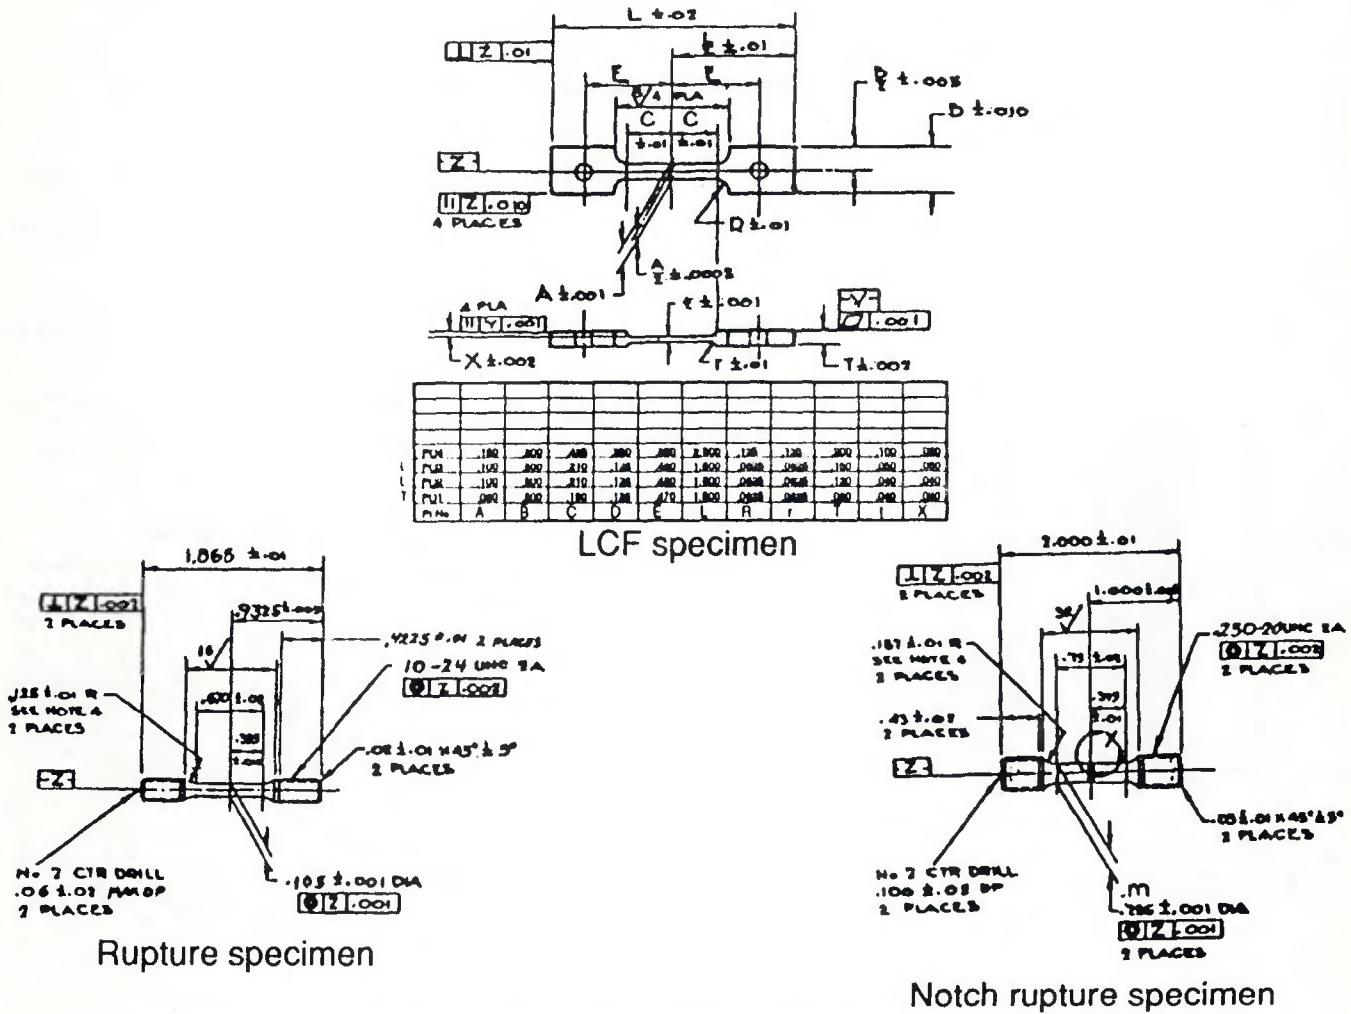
Schematic of subscale mechanical test specimens used in the evaluation of the weldment mechanical properties.
